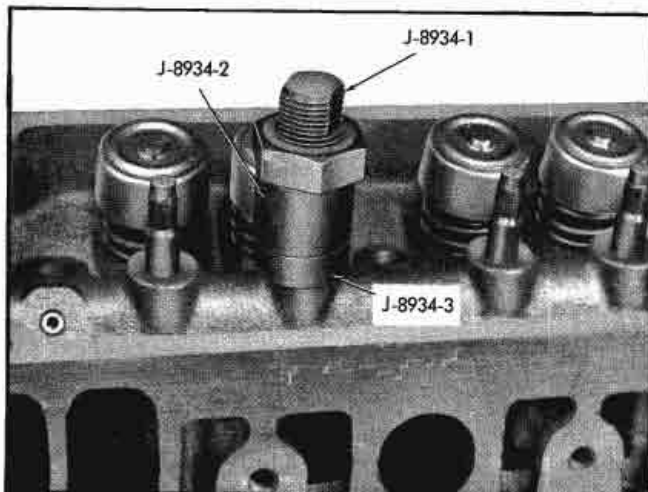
Tool J-8934 Positioned to Remove Rocker Arm Stud
